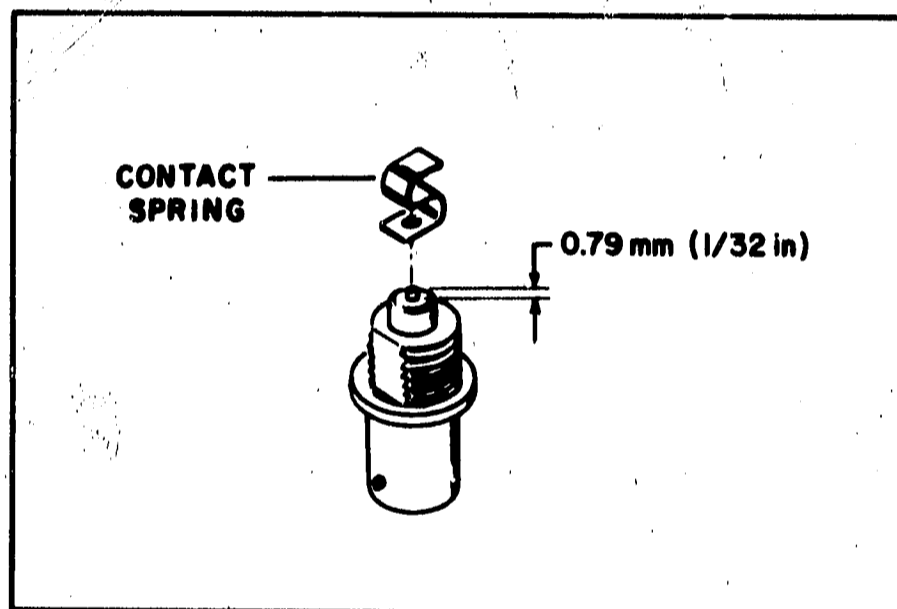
Cutting Center Conductor Lead to Accommodate Contact Spring
